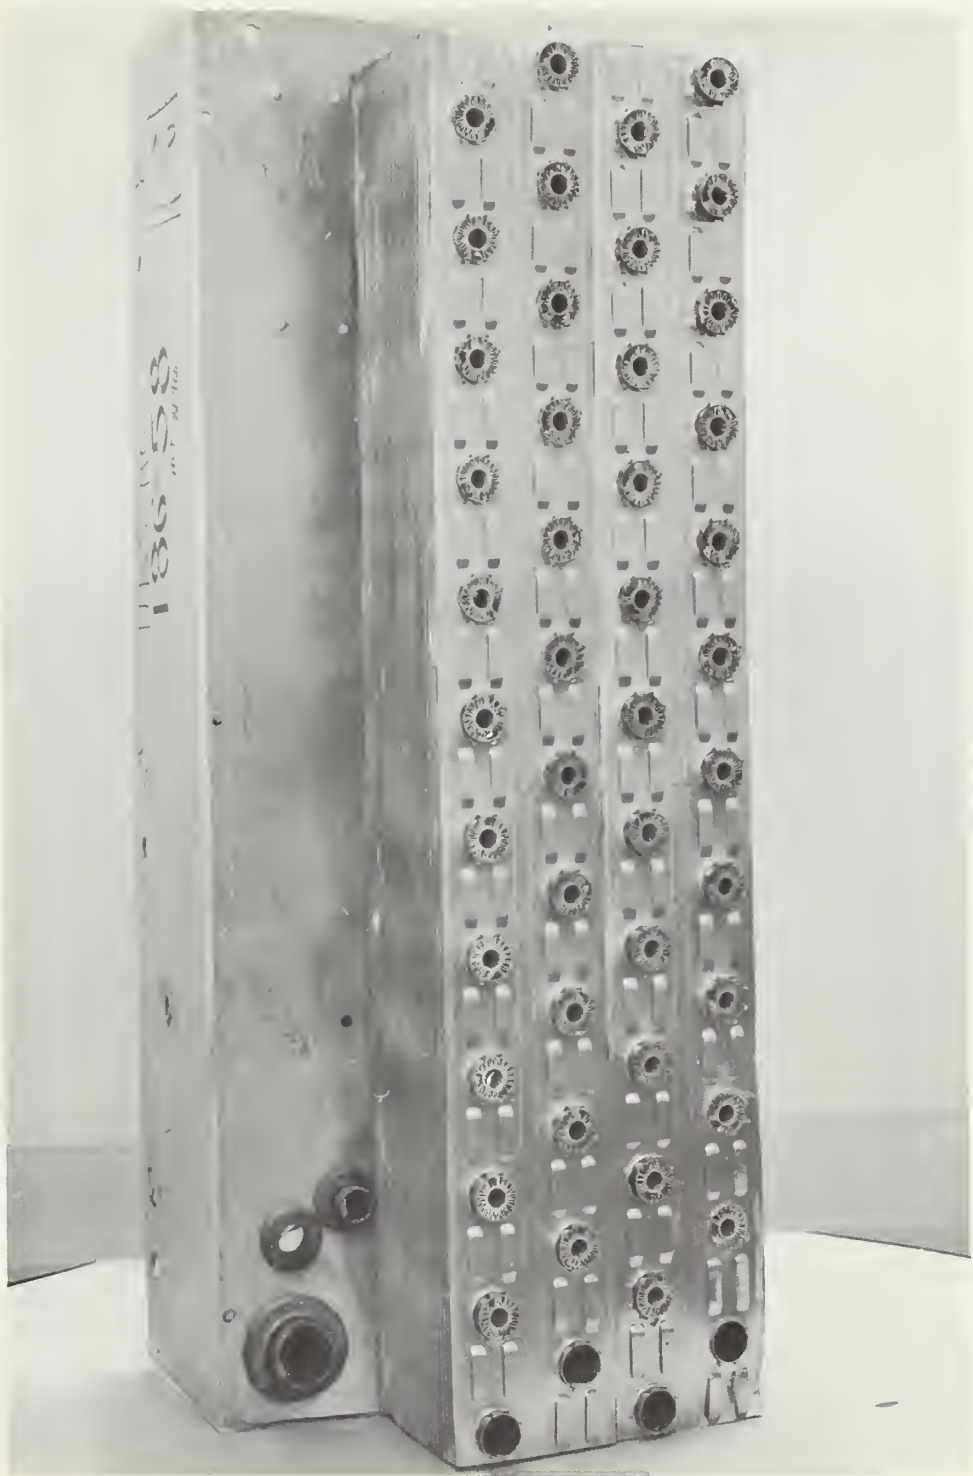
Section of Dunham-Bush coil showing typical fin and tube assembly. Note "Inner-Fin" construction in all except bottom four tubes.
